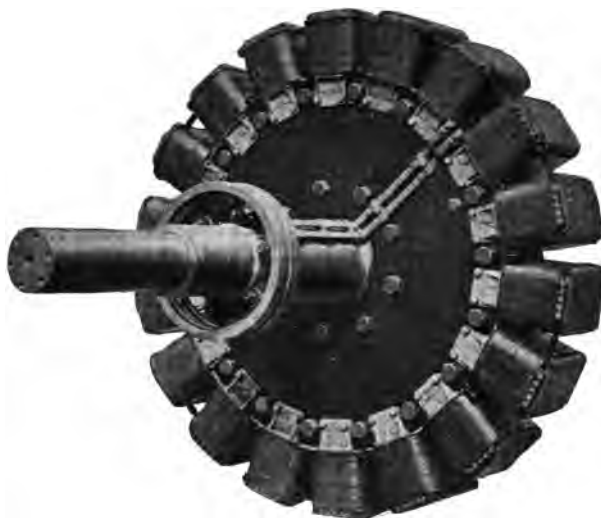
Rolled Steel Plate Spider with Field Coils Assembled (Westinghouse).
